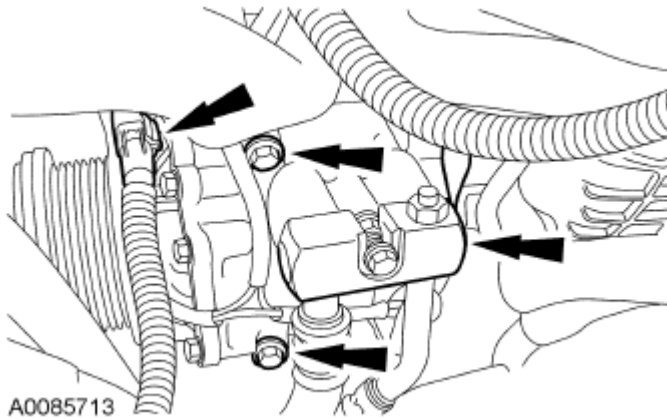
Locating A/C Compressor Electrical Connector And Bolts
